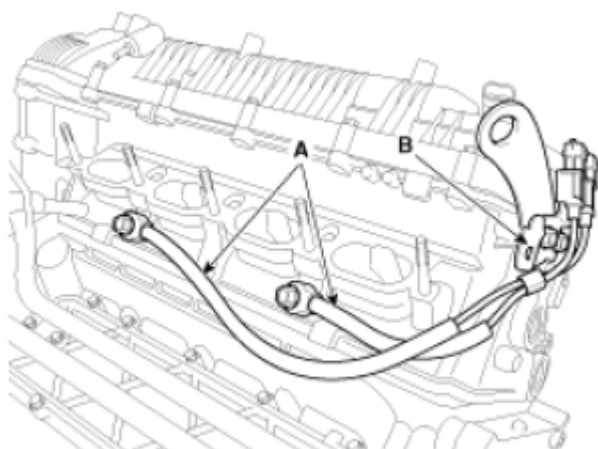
Identifying Knock Sensors And Wiring Assembly Bracket
